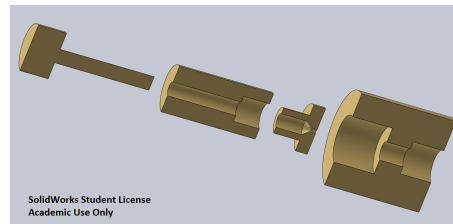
Cross section of Solidworks drawing of Indium extruder. Four components are: piston, chamber, shaping die and holder (from top to bottom).
